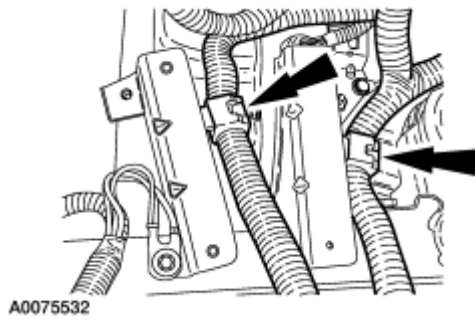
Locating Battery Tray Bracket & Wiring Harness
